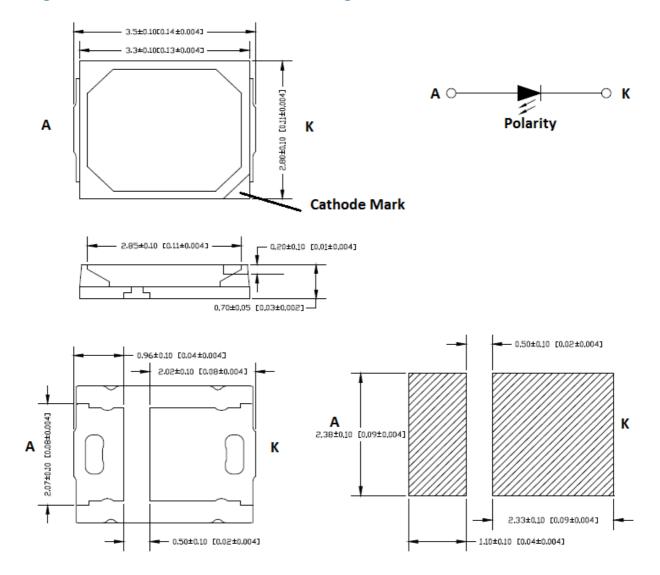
Mechanical Drawing & Soldering Pattern of the 2835 package
